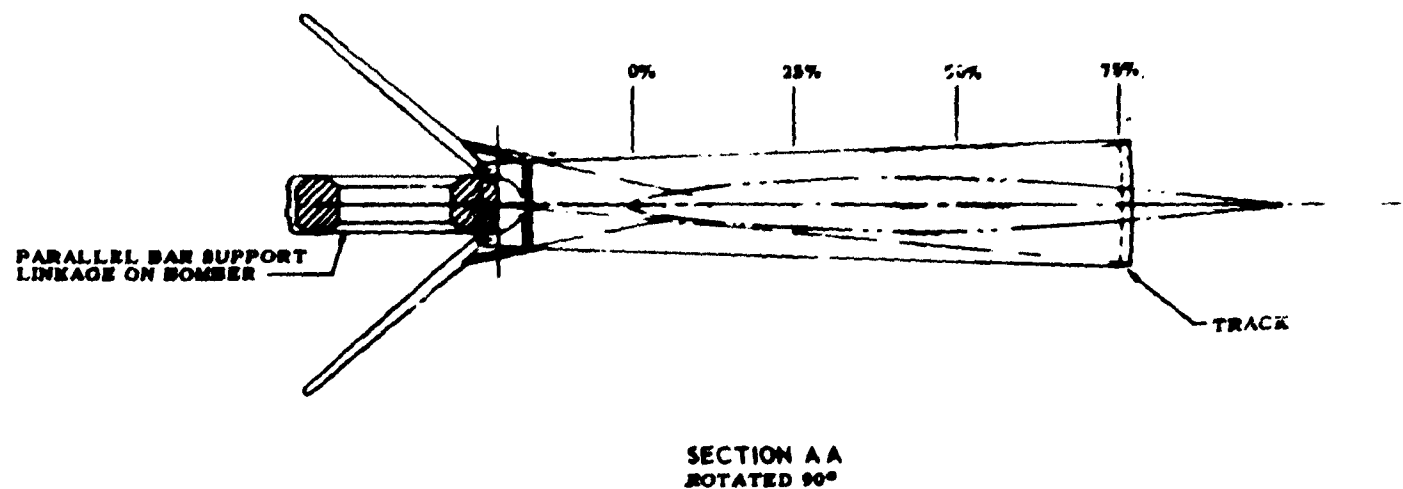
BALL AND SOCKET JOINT COUPLING - APPROACH CONDITION
